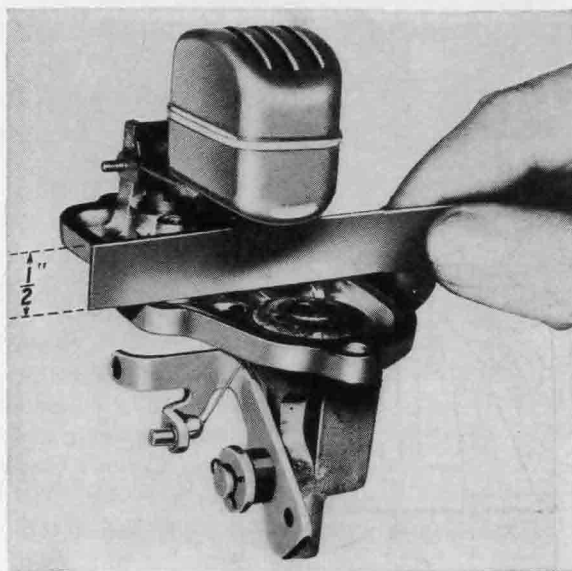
Checking the float-level height between float and bowl cover on one type of carburetor. (Chevrolet Motor Division of General Motors Corporation)
